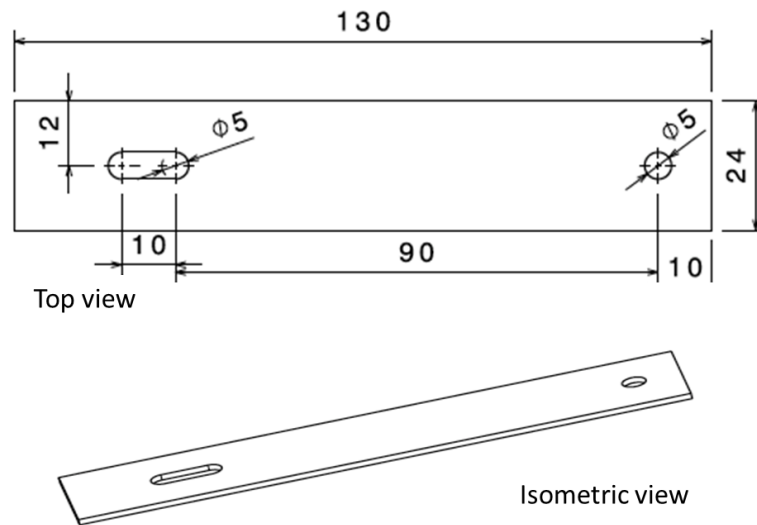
The dimensions (mm) and the shape of the corrosion test samples of 304L stainless steel.
